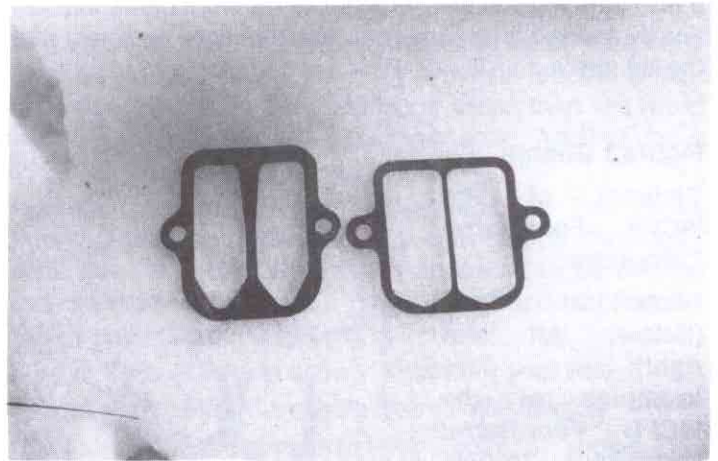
Photo D — Left original second design FI intake gasket used in '60 to '62 'Vettes have a "bolt-to-bolt" measurement of 3-3/8-inches. Right third design FI intake gaskets used on '63-'64 'Vettes have a "bolt-to-bolt" measurement of 4-1/8-inches.
